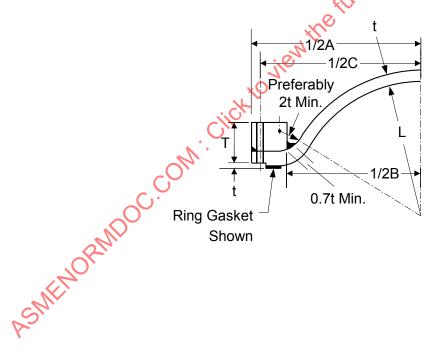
(VIII-2 Figure 4.7.3) – Type C Spherically Dished Cover with a Bolting Flange
